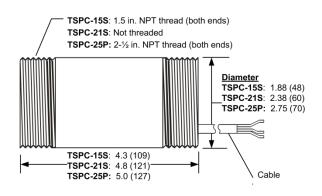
Mechanical Drawing, TSPC-15S/21S/25P
